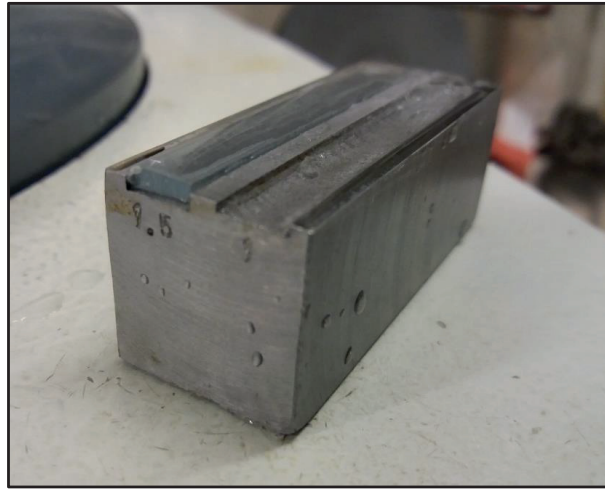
Steel sample holder for grinding rectangular epoxy samples.
